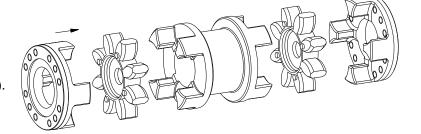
Assembly of driving flanges, spiders and DKM spacer
